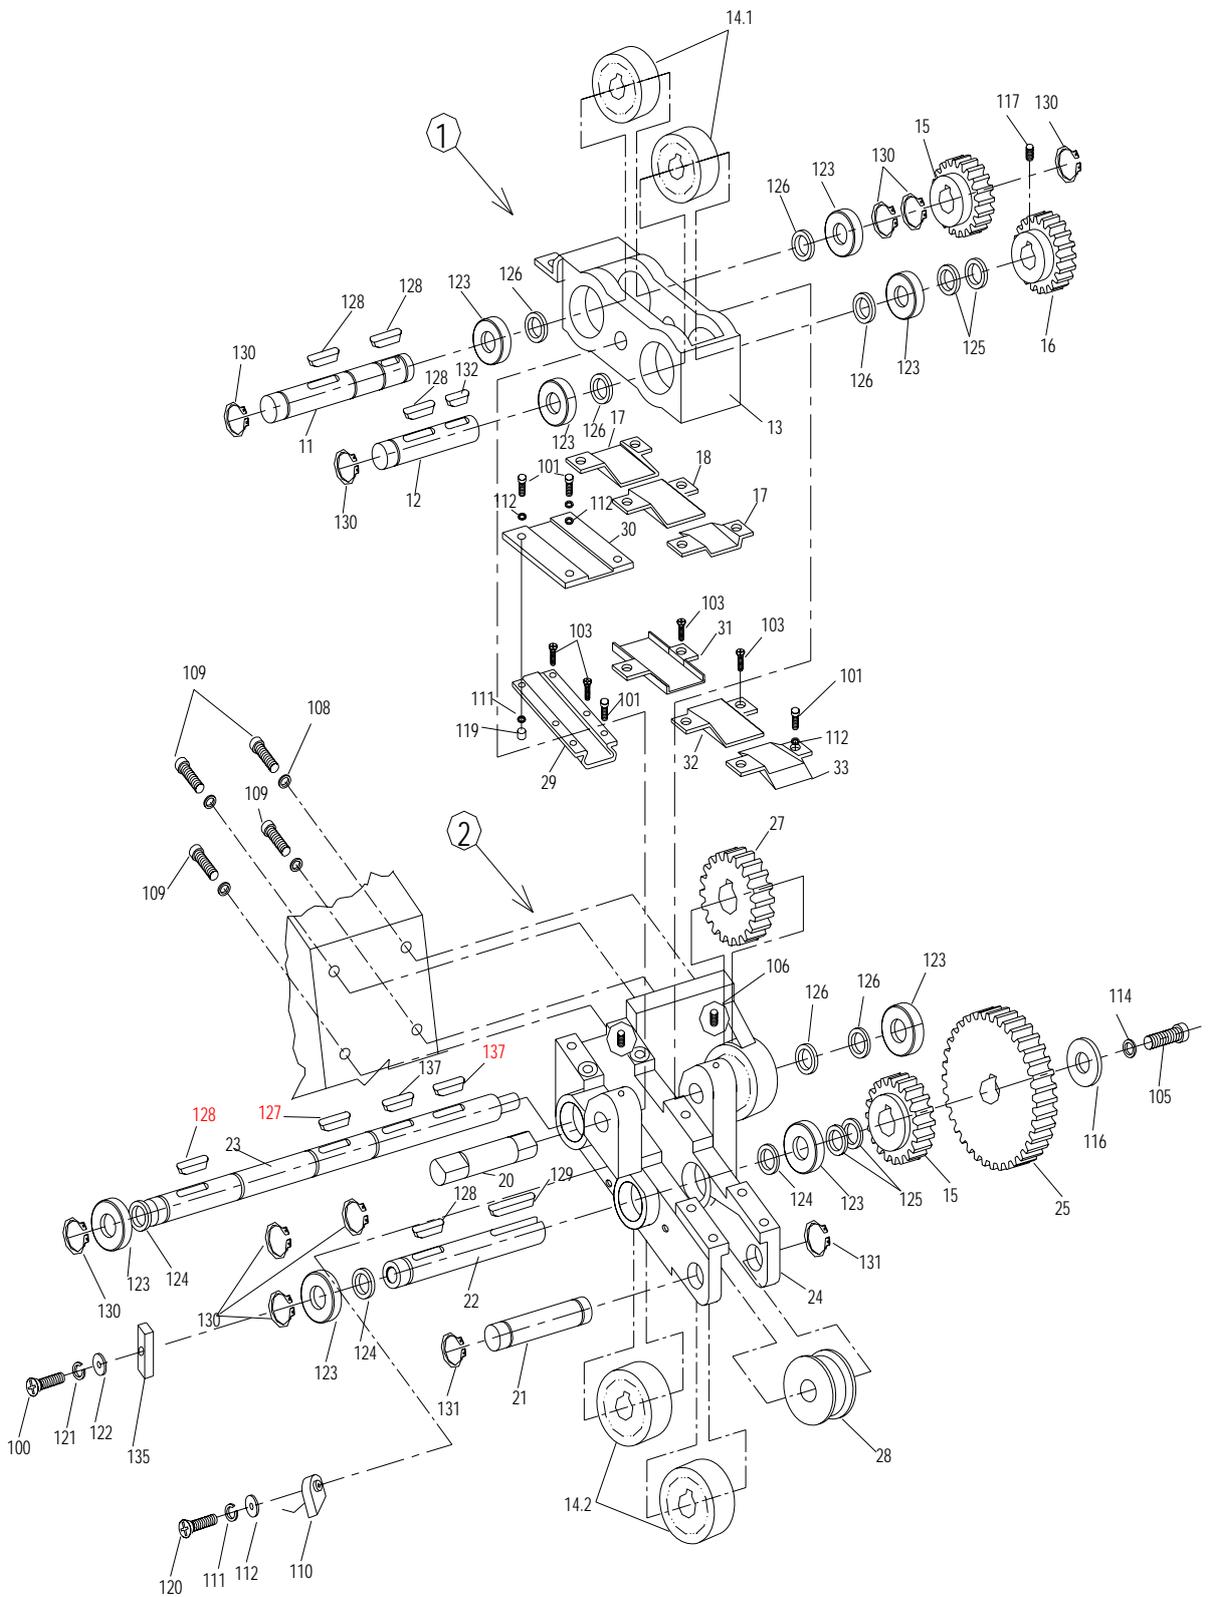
DRIVE AND CAM ASSEMBLIES
